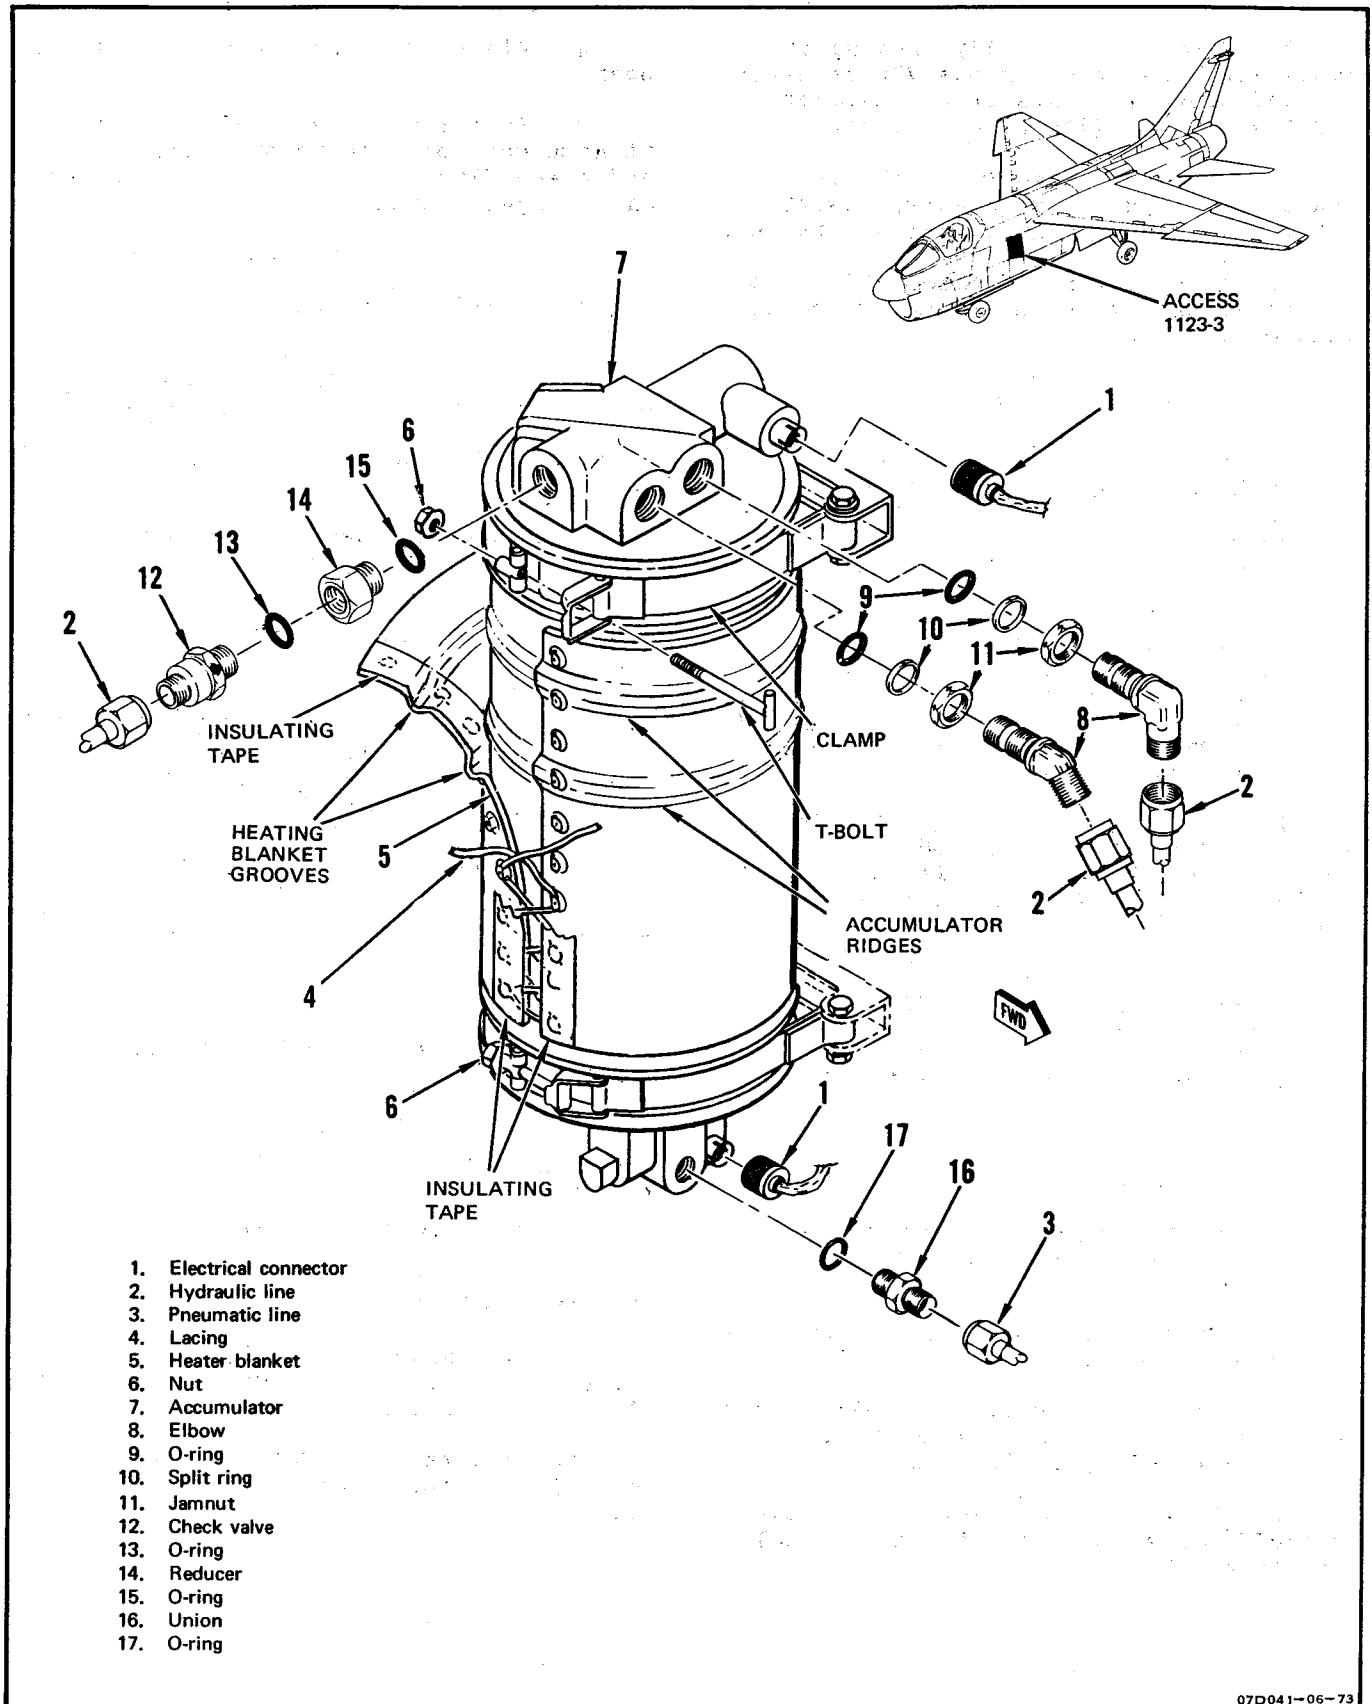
Landing Gear Emergency Accumulator Package Removal and Installation
